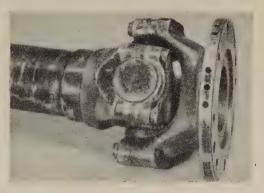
Compensation of defects in counterbalance by means of holes drilled in the periphery of the flange.
